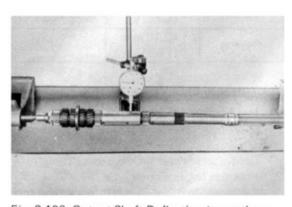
Output Shaft Deflection Inspection
